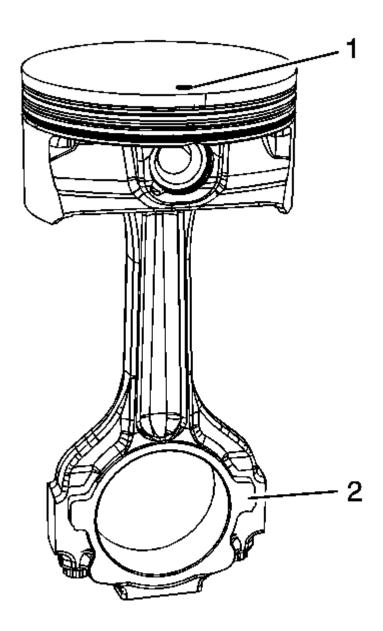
Locating Mark On Top Of Piston & Connecting Rod Tab Courtesy of GENERAL MOTORS CORP.
